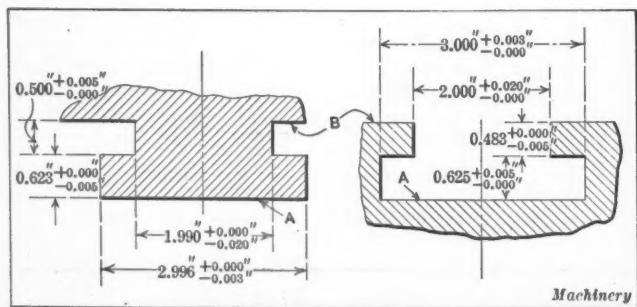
Incorrect Dimensioning of Slide shown in Fig. 8
